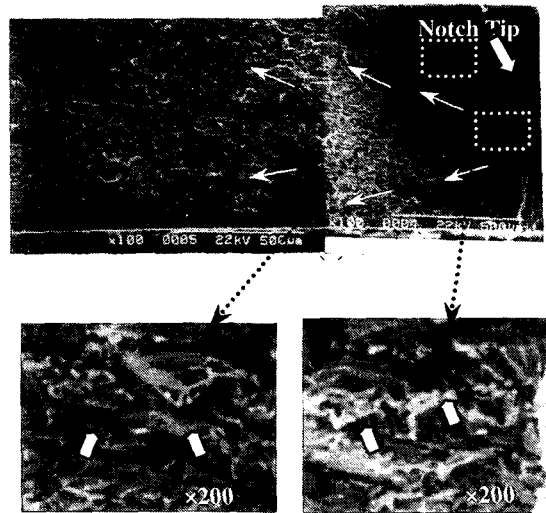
Fatigue fracture surface of 40×20mm patch specimen. (a) Fatigue fracture of the specimen. (b)(c) Higher-magnification view of the secondary cracks and steps, shown in (a).
